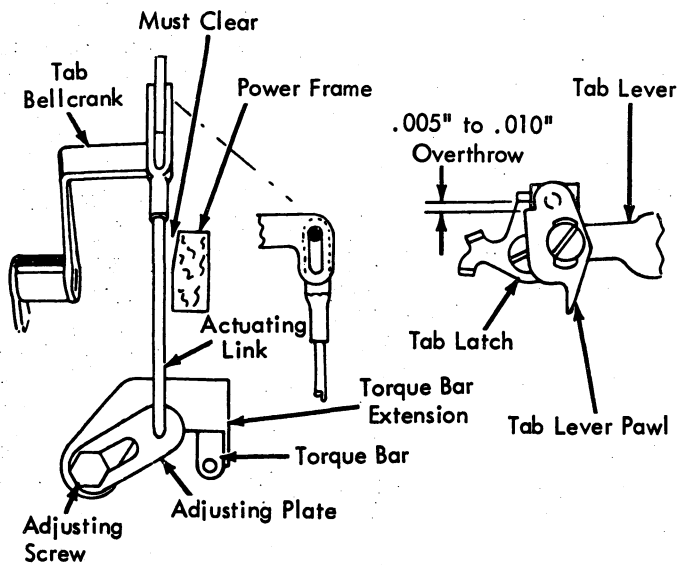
Adjusting Plate, 11 Inch Machine
